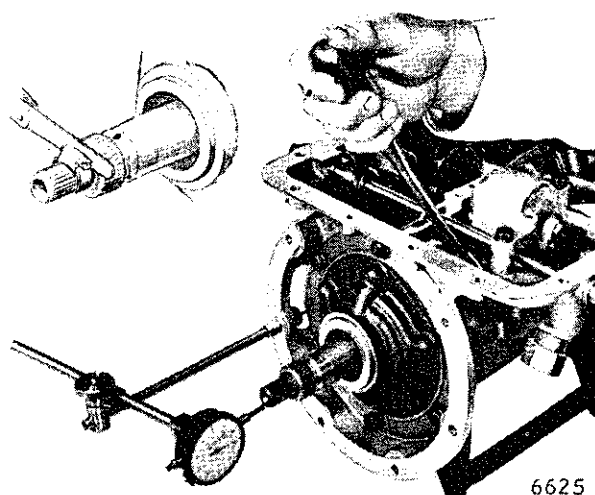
Measuring input shaft end float (Inset shows alternative method using a hose clip and feeler gauges)
